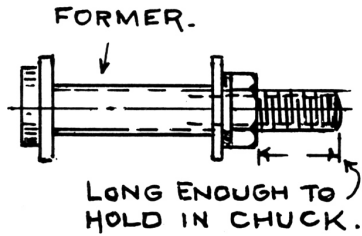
HOLDER FOR FORMER WHEN WINDING.
